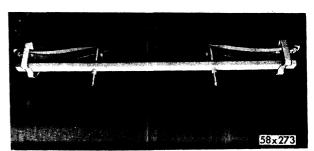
Front Suspension Height and Level Gauge Measuring Pins and Clips
